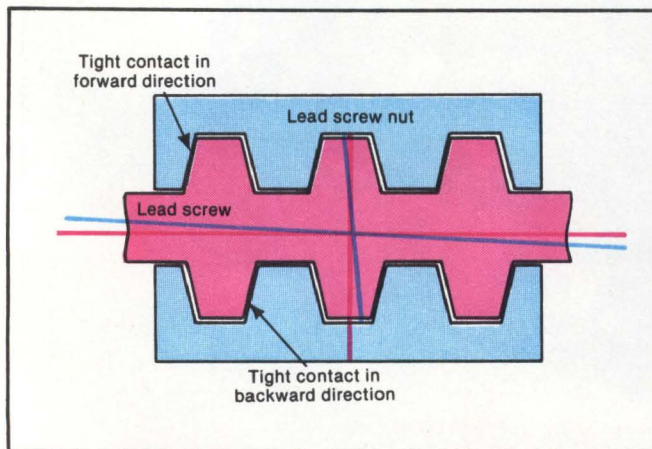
The lead screw nut is off-center relative to the threads of the lead screw to maintain both forward and backward contact. This eliminates mispositioning caused by tolerance problems in these parts. The overlapping centerlines show the center position of the lead screw versus the center position of the nut.
